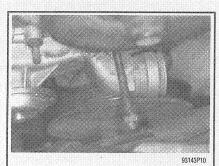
This long bolt has to be removed to remove the water pump. You will have to lift the engine slightly to slide the bolt out freely
